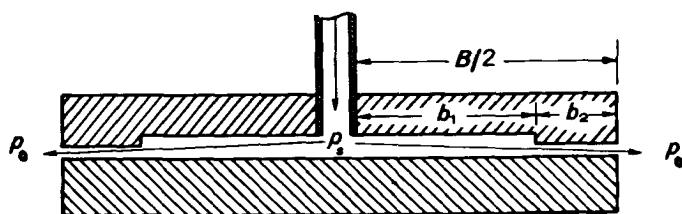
Externally pressurized step outlet restrictor bearing.
